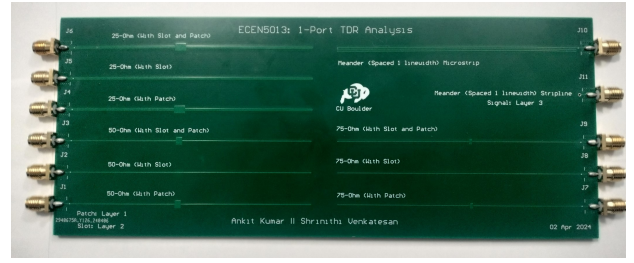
Assembled Printed Circuit Board with SMA Connectors
